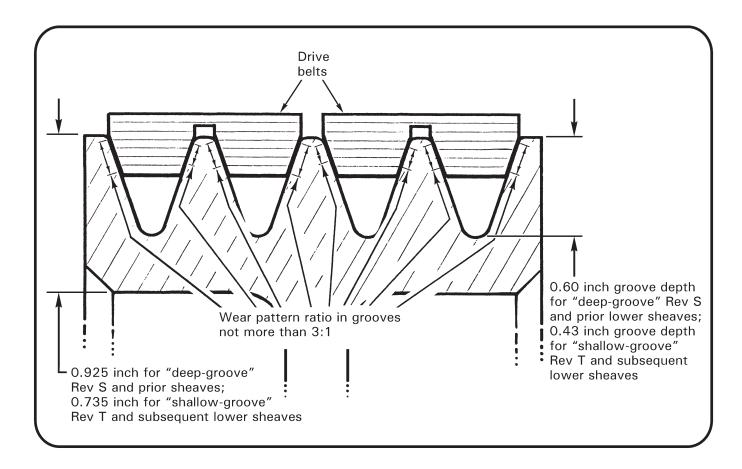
LOWER SHEAVE V-BELT WEAR PATTERN
